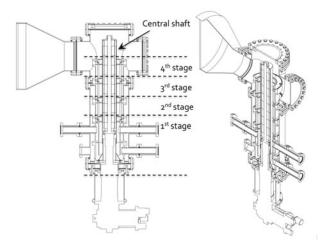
CAD plots of the prototype of SJP (courtesy of Kazama Engineering Co., Ltd.).
